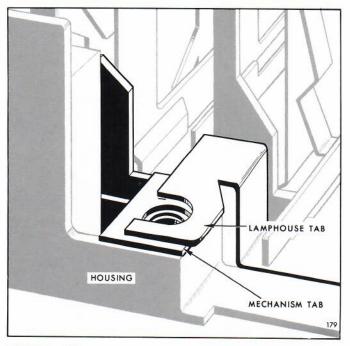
REASSEMBLY OF LAMPHOUSE AND MECHANISM ASSEMBLY
